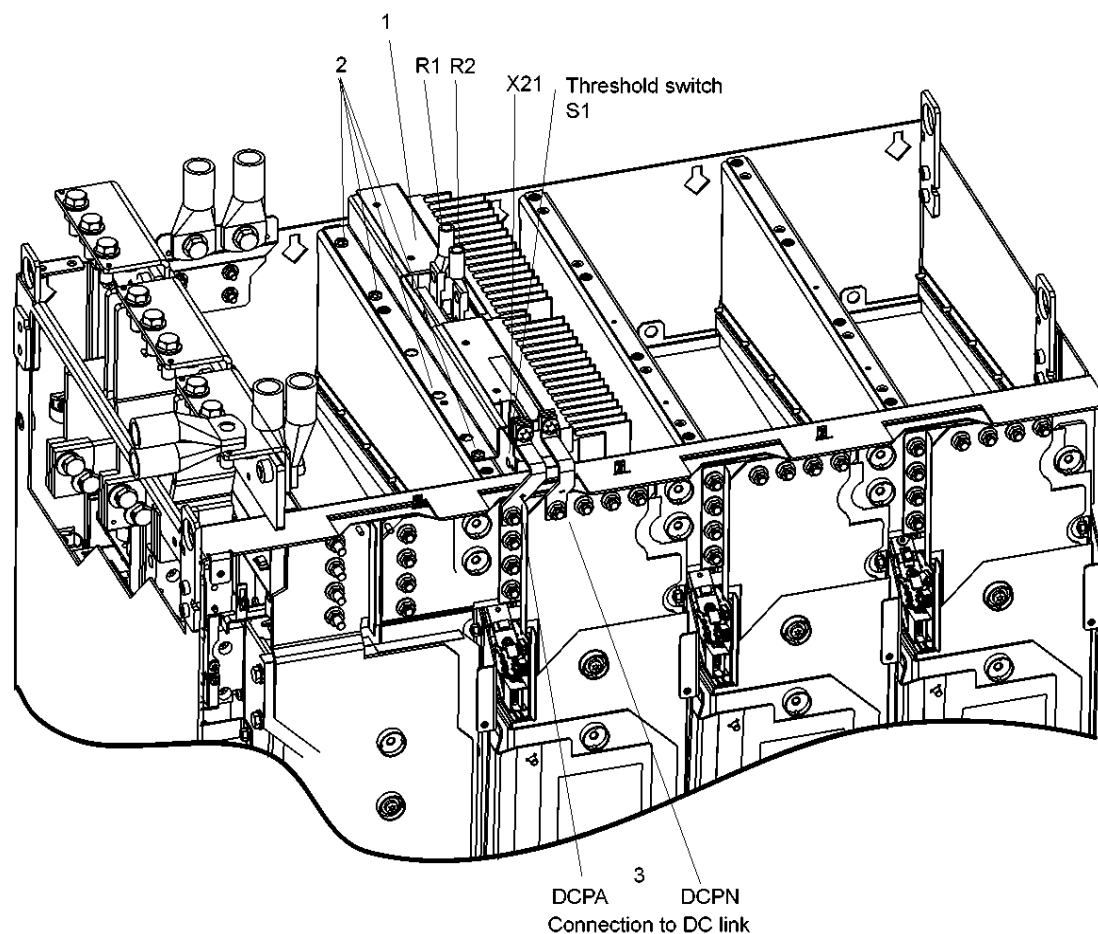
Installing a Braking Module in an Active Line Module or a Motor Module (type JX)
